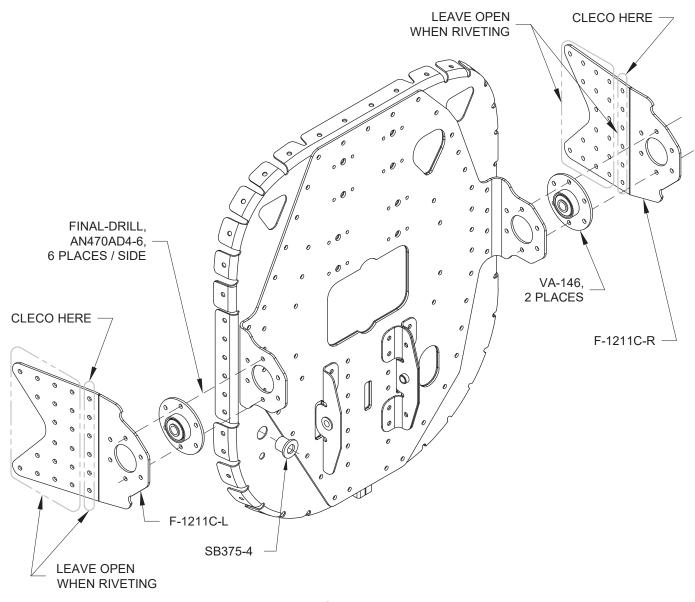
BUSHINGS AND HINGE BRACKETS
